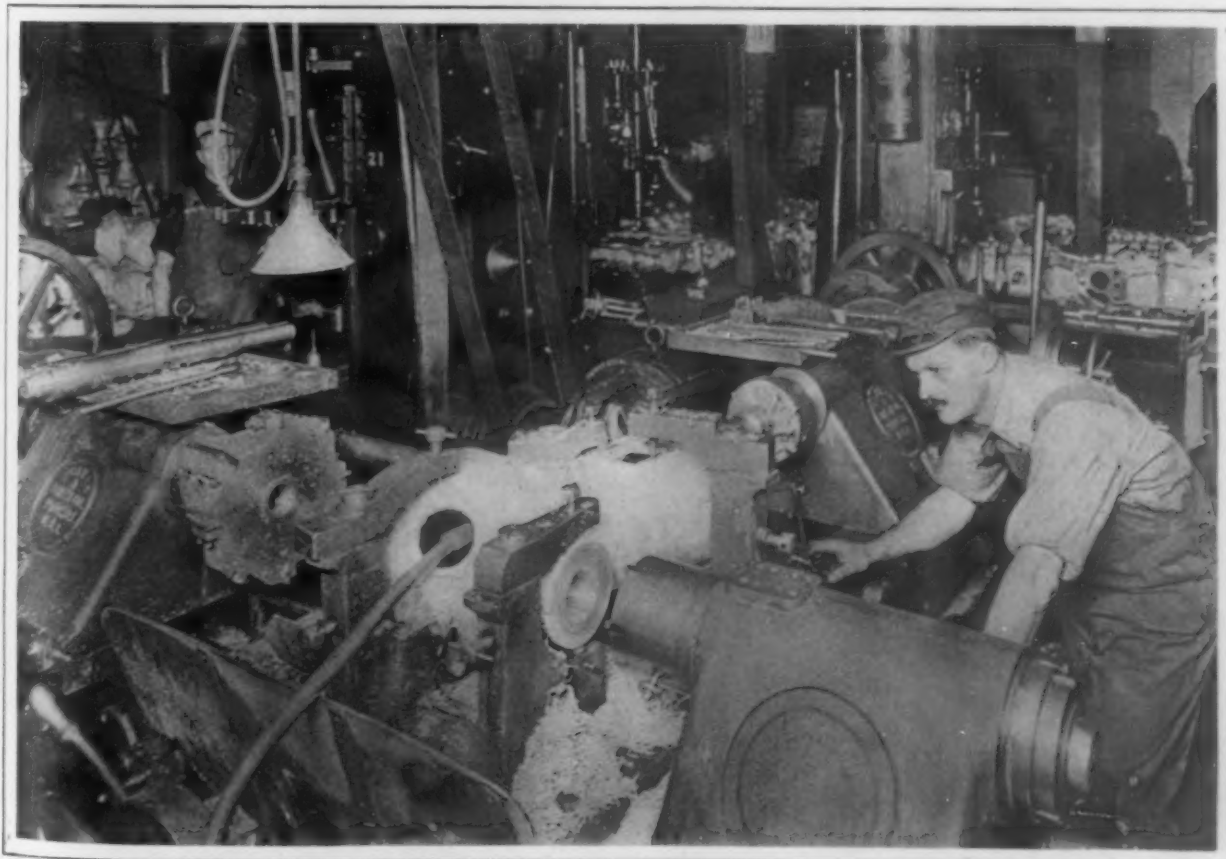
The Machining of the Transmission Case Is Shown in This View on a Special Milling Machine with Three Spindles Mounted in Traveling Heads
